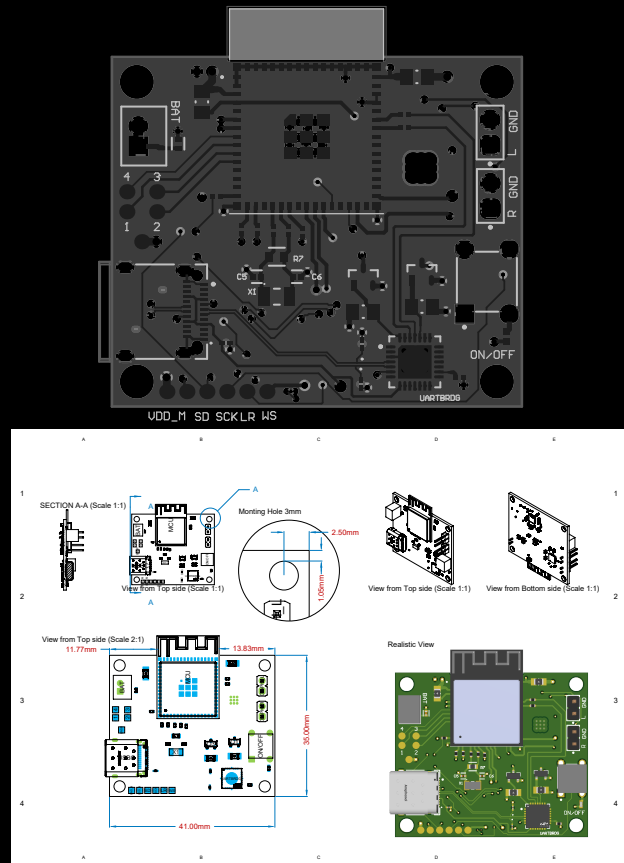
Top: Figure depicting the top component layer of the Audio Board 1. Bottom: PCB documentation blueprint for the Audio Board 1, depicting dimensions, notes and layer stack.
